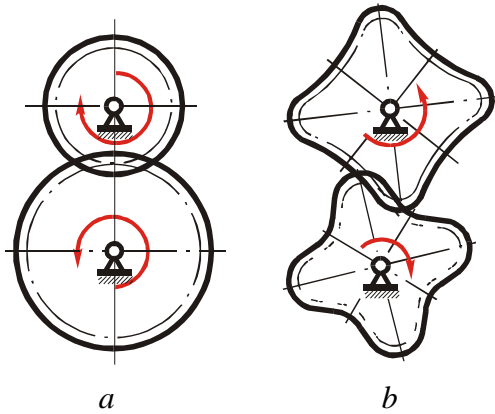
Forms of gears: *a* – cylindrical gears;
